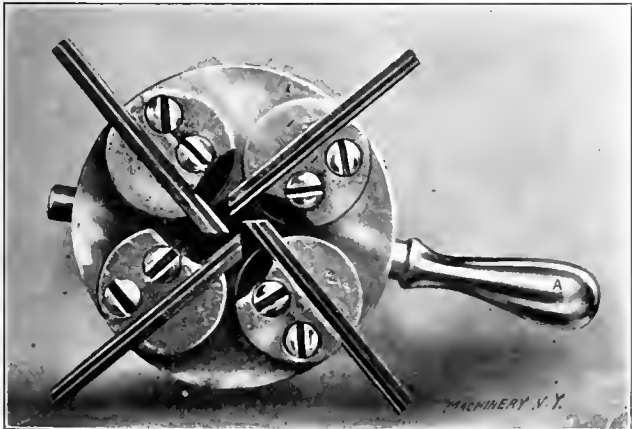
Small Self-opening Die used for Threading Taps up to 3-8 inch Diameter, in Horizontal Machines.
